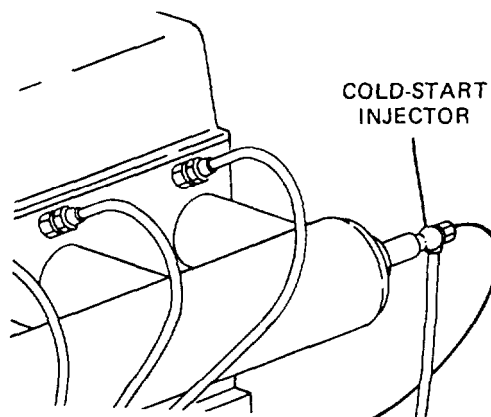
Typical cold-start injector mounted on the intake manifold.
